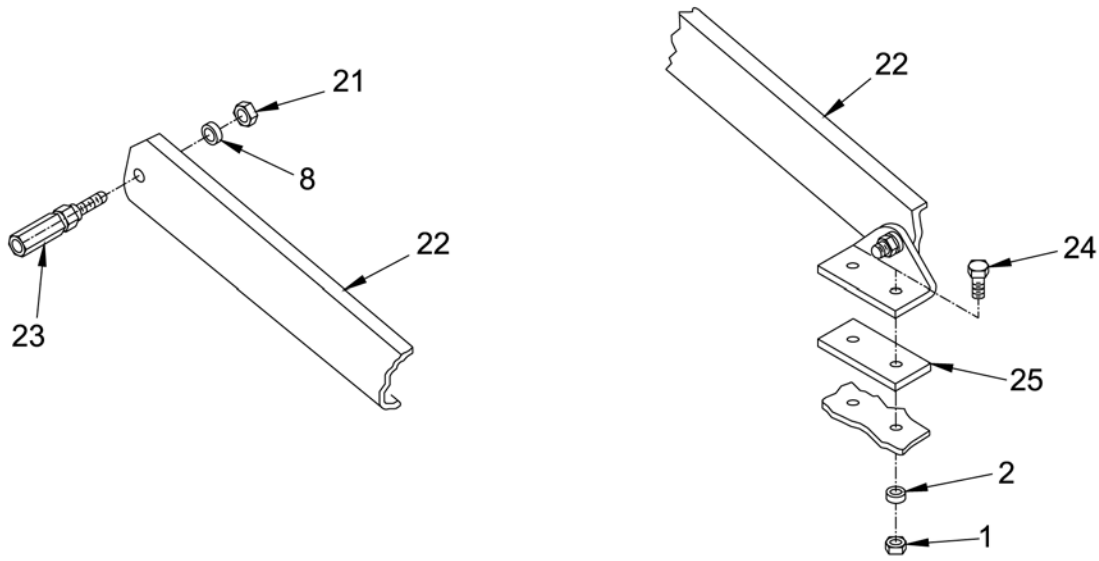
Frame and Housing Assembly/Main Access Cover (Sheet 2 of 4).
